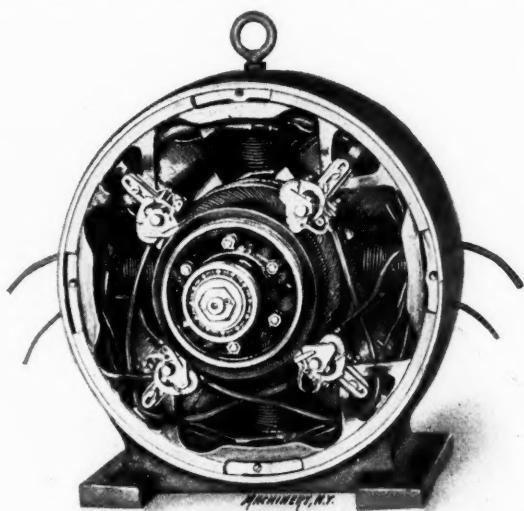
Motor with Front Frame Removed, showing Ball Bearings.
